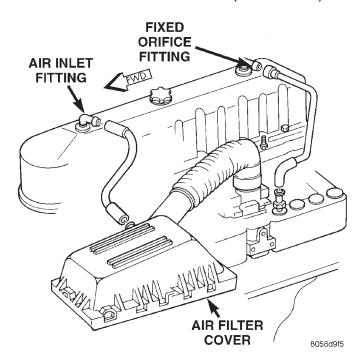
Install Orifice Tool 4.0L 6-Cylinder Engine
